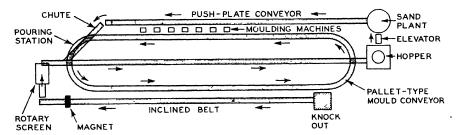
ARRANGEMENT OF SAND PLANT IN A HIGHLY MECHANISED IRON FOUNDRY
